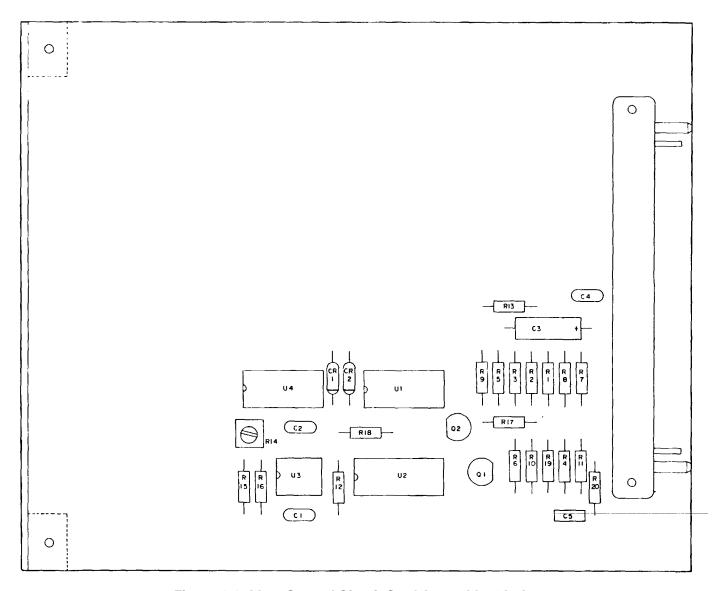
Ident Control Circuit Card Assembly, 1A2A3
